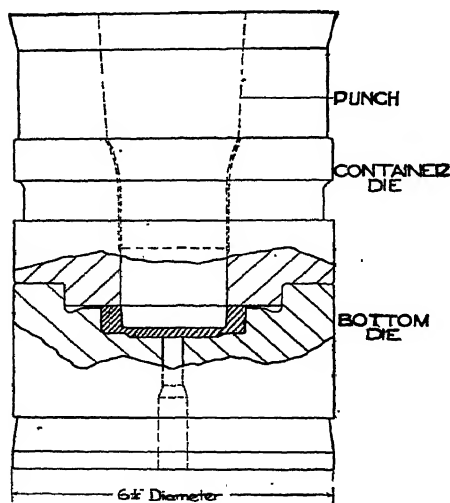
THREE-PIECE DIE FOR FORMING RING SHOWN IN FIG. 9.
